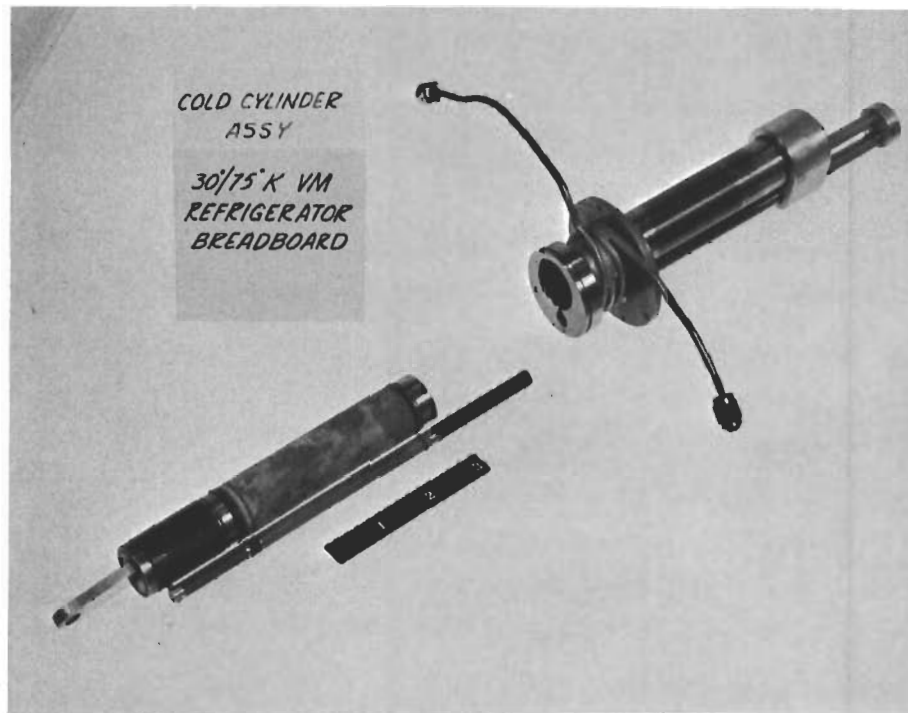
Cold cylinder assembly parts of unit 447550-100 (HAC Photo 4R02919)
